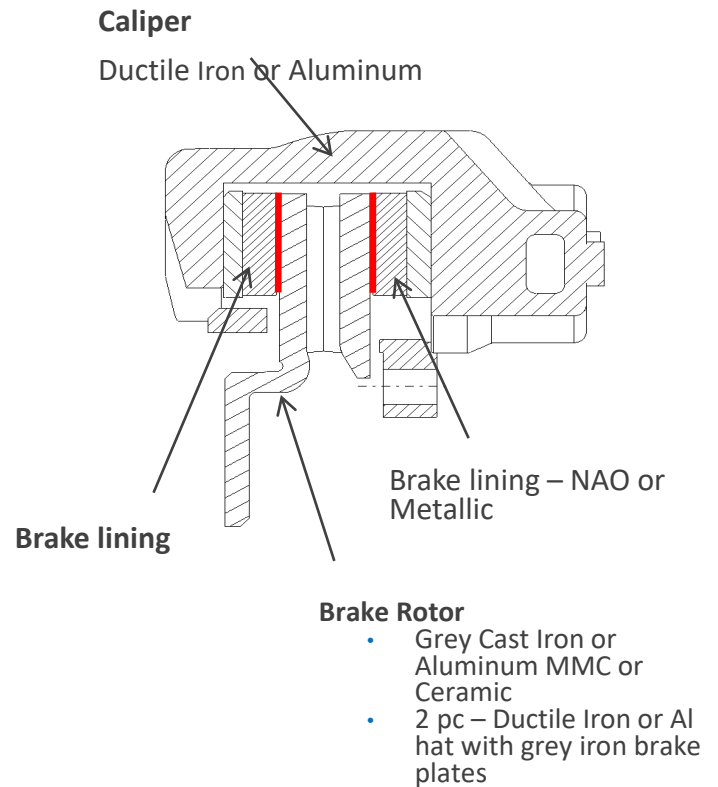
Brake Rotor and Caliper Assembly Illustration
